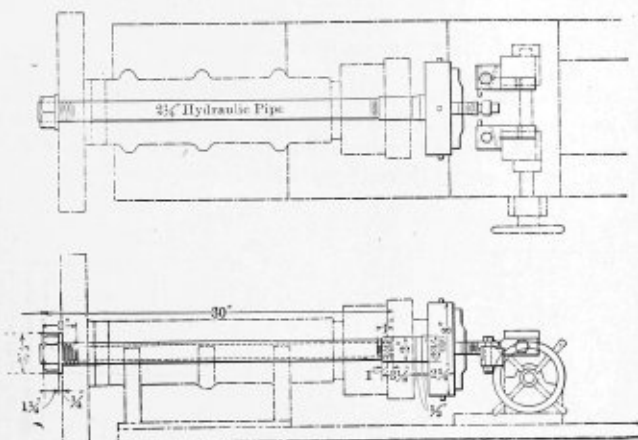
STAY-BOLT CUTTER APPLIED TO SCREW-CUTTING MACHINE.
